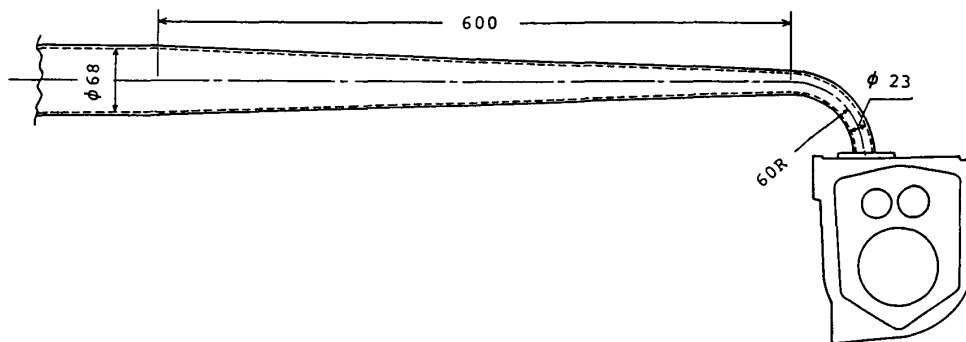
Drawing and its dimensions of an exhaust pipe attached to the cylinder of the engine.
